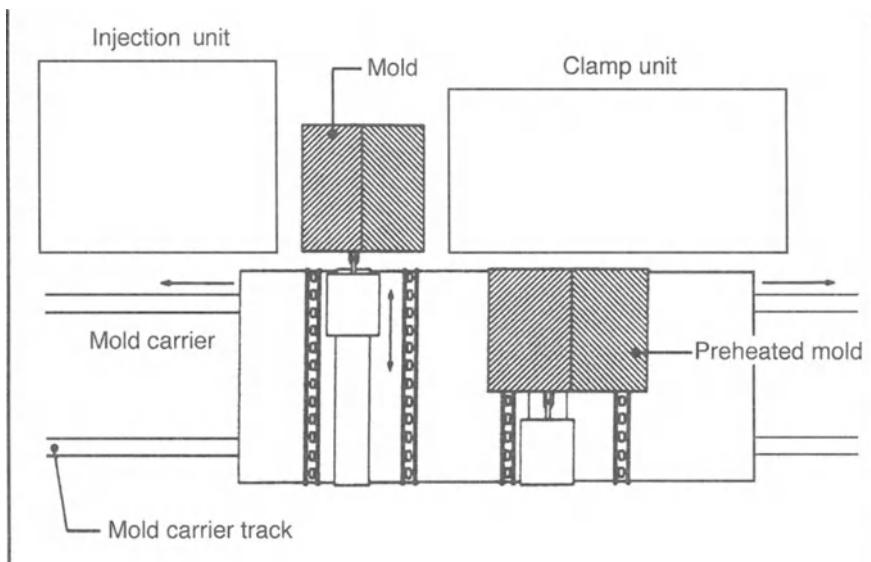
Schematic of a fully automated quick mold change device: production interrupted for 1 to 2 min.
